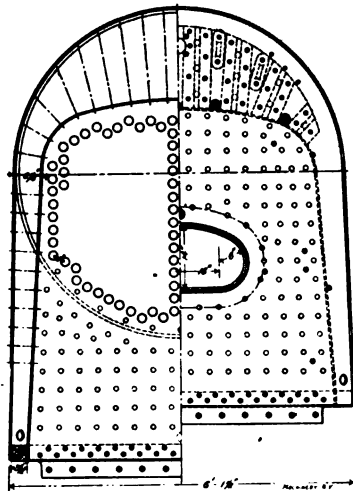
Cross Section of Boiler shown in Fig. 4.
